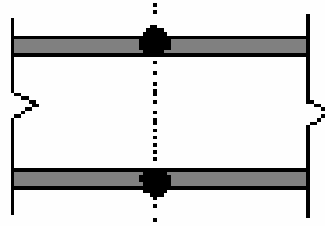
Girth Butt-Welded Straight Pipe
